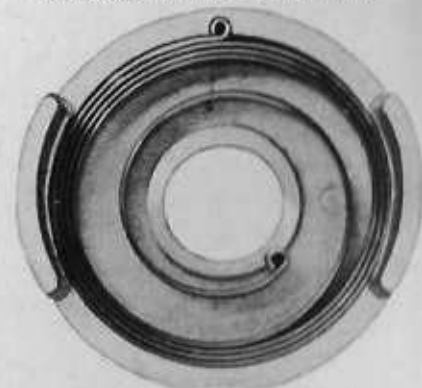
MAGNETO IMPULSE COUPLING SPRING
